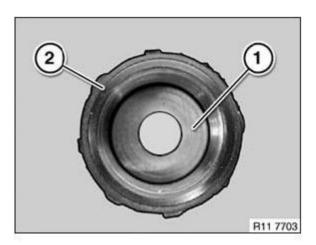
Identifying Valve Cage Courtesy of BMW OF NORTH AMERICA, INC.
